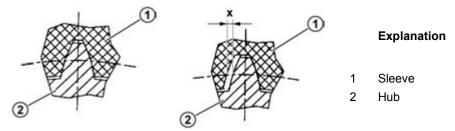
Measurement of gear sleeve wear for gear BoWex couplings®
